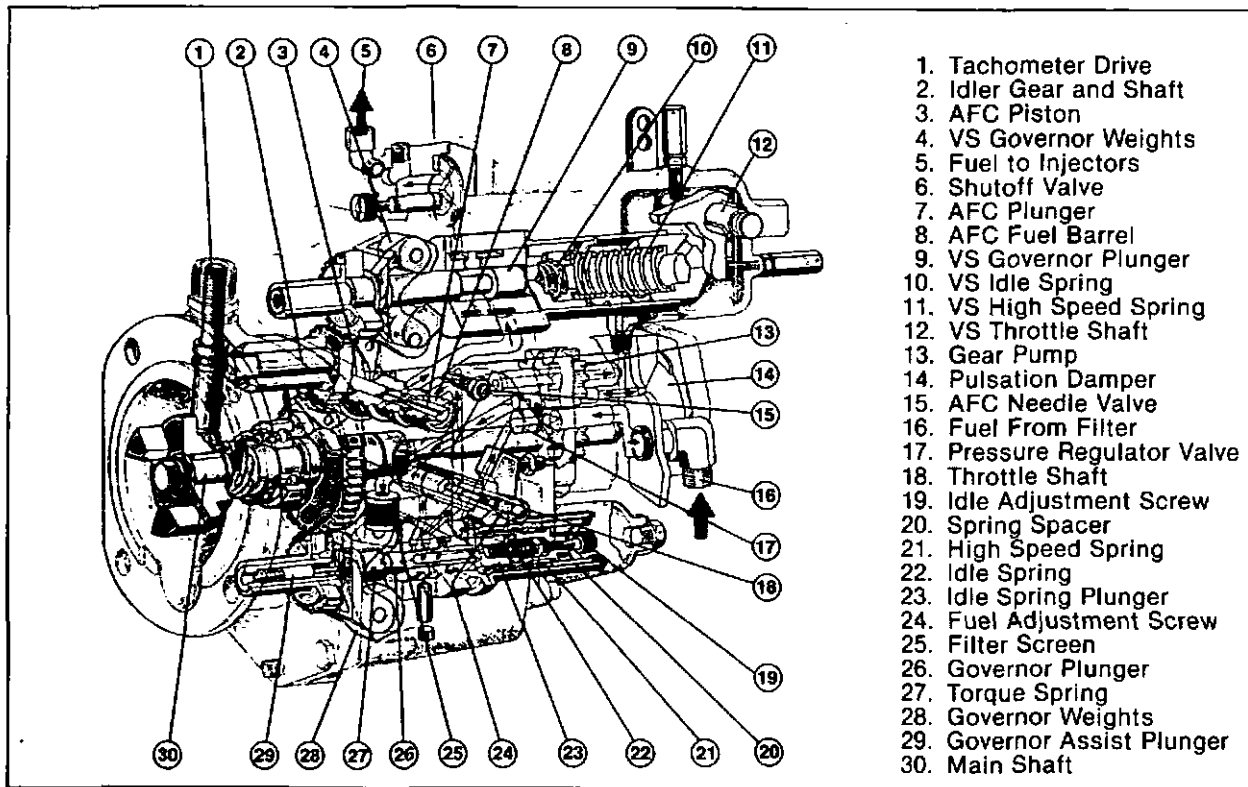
, (FWC-38). PT (type G) fuel pump with Variable Speed Governor and Air Fuel Control.
